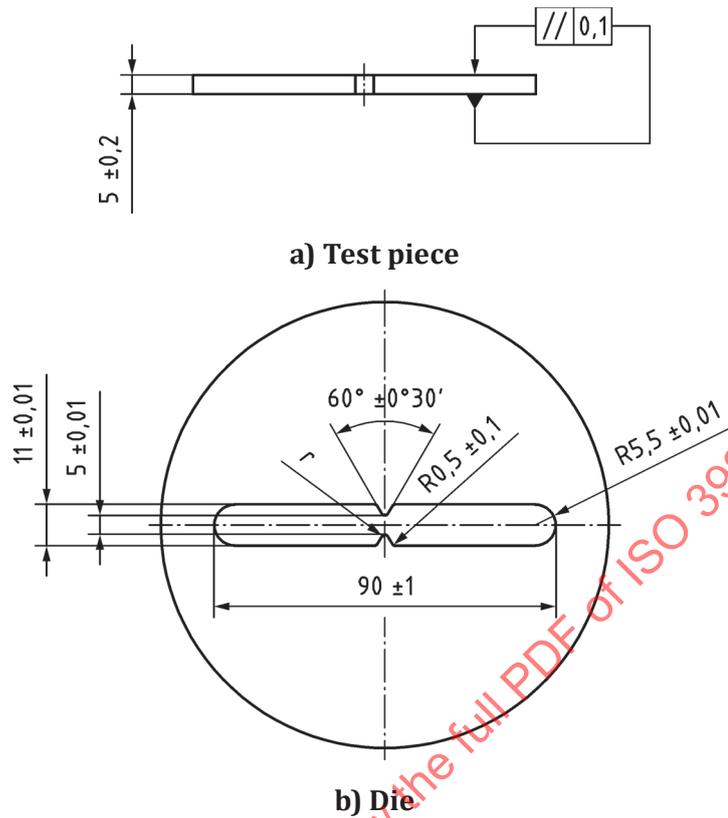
Notched test piece and compacting die for use with notched fatigue test pieces
